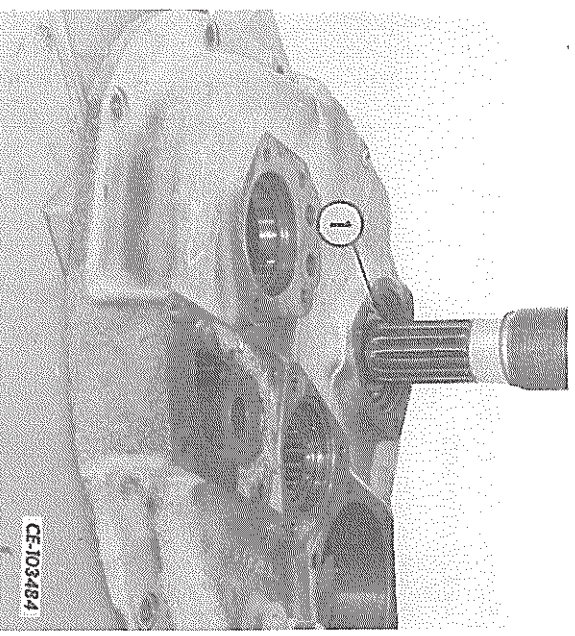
Removing the Forward Clutch Shaft Assembly
